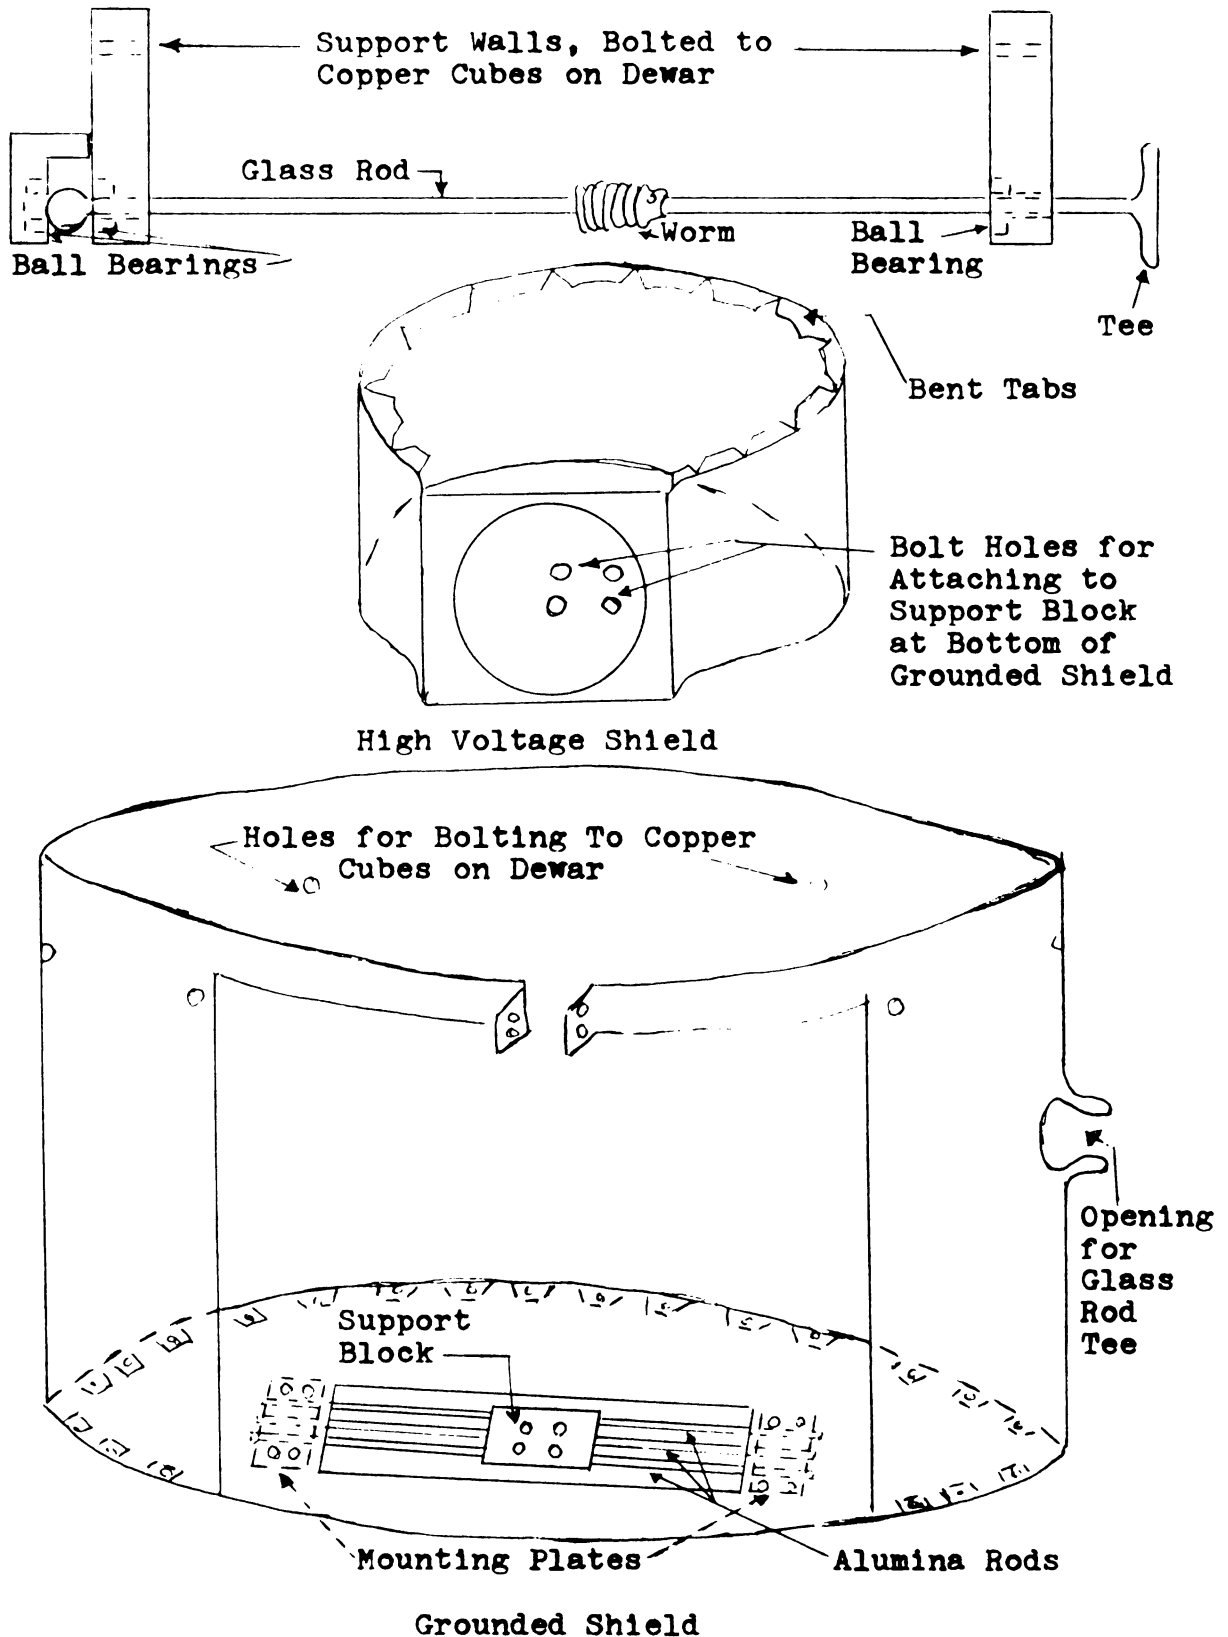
THE DESIGN OF HIGH VOLTAGE AND GROUNDING SHIELDS AND A HOLDER FOR THE GLASS ROD USED TO CONNECT THE MAGNETIC ROTATOR SYSTEM TO THE WORM GEAR.
